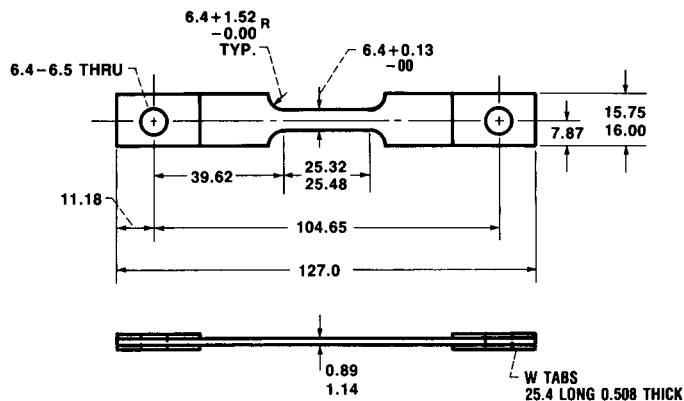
TENSILE CREEP-RUPTURE TEST SPECIMEN (DIMENSIONS IN MM).
